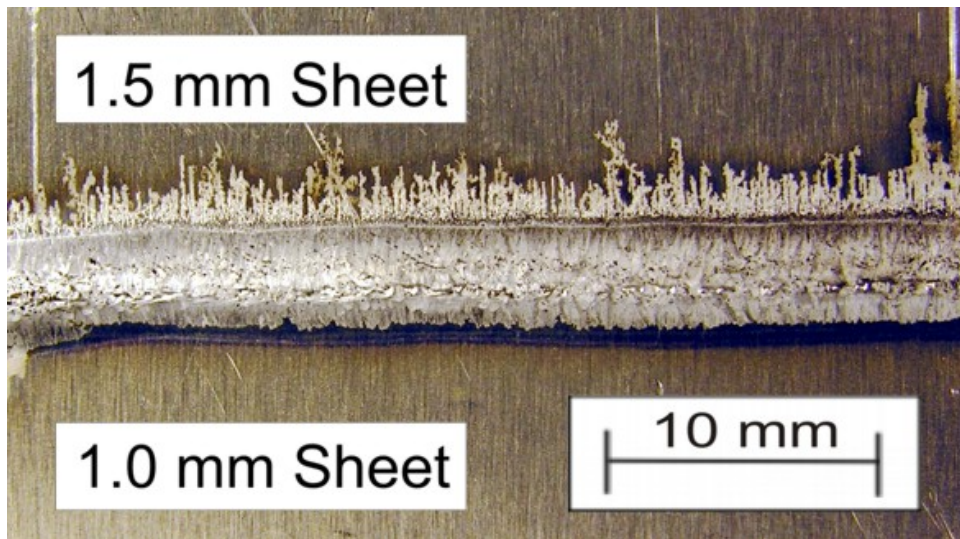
Substantial cathodic etching is observed on the bottom of the 1.5 mm sheet despite the welding torches being centered over the 1.0 mm sheet at a distance of 2 mm from the joint centerline.
